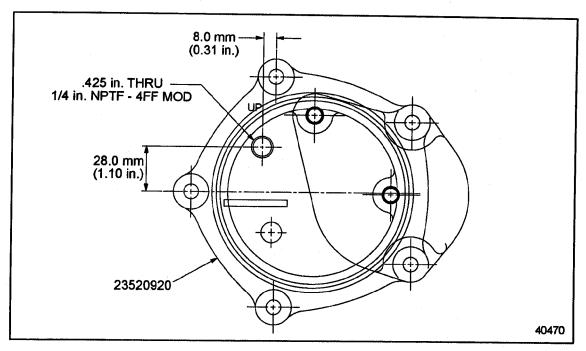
Location of Drilled and Tapped Vent Line Hole in Auto Tensioner Mounting Plate
